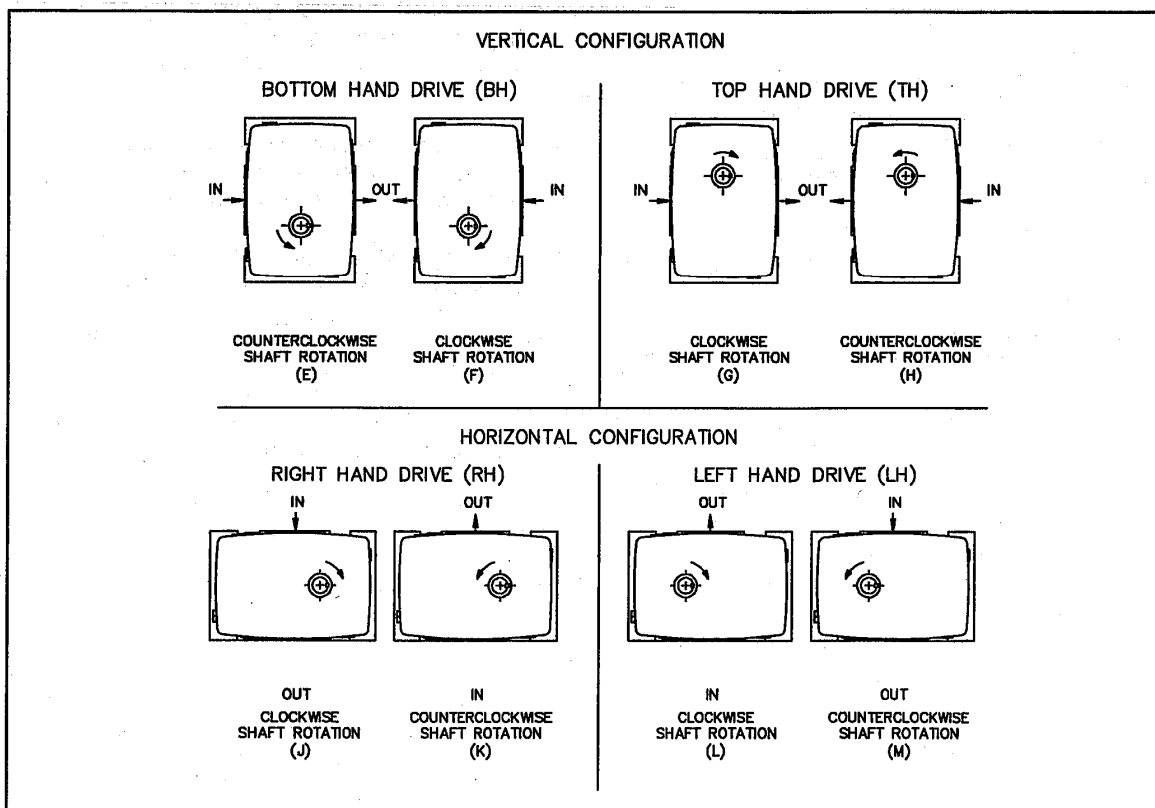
BLOWER MOUNTING CONFIGURATIONS
